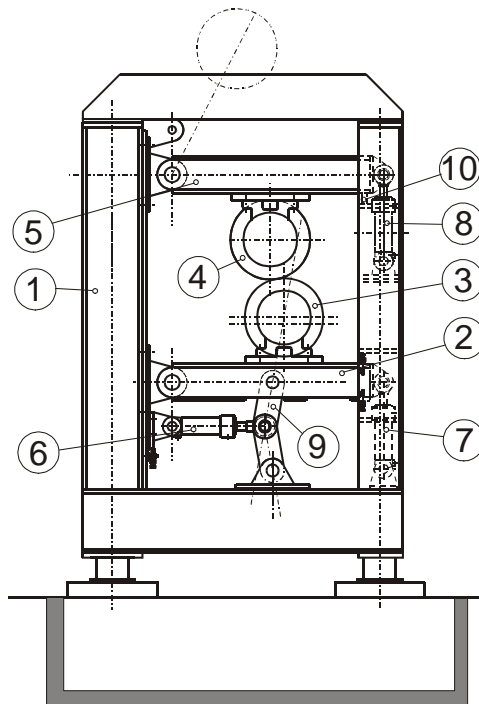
The components and structural parts of the pilot roll press: frame (1), loading arm (2), lower hard roll (3), upper soft roll (4), support arm (5), loading cylinder (6), alternative loading cylinder (7), locking cylinder (8), loading mechanism (9) and load cell (10).
